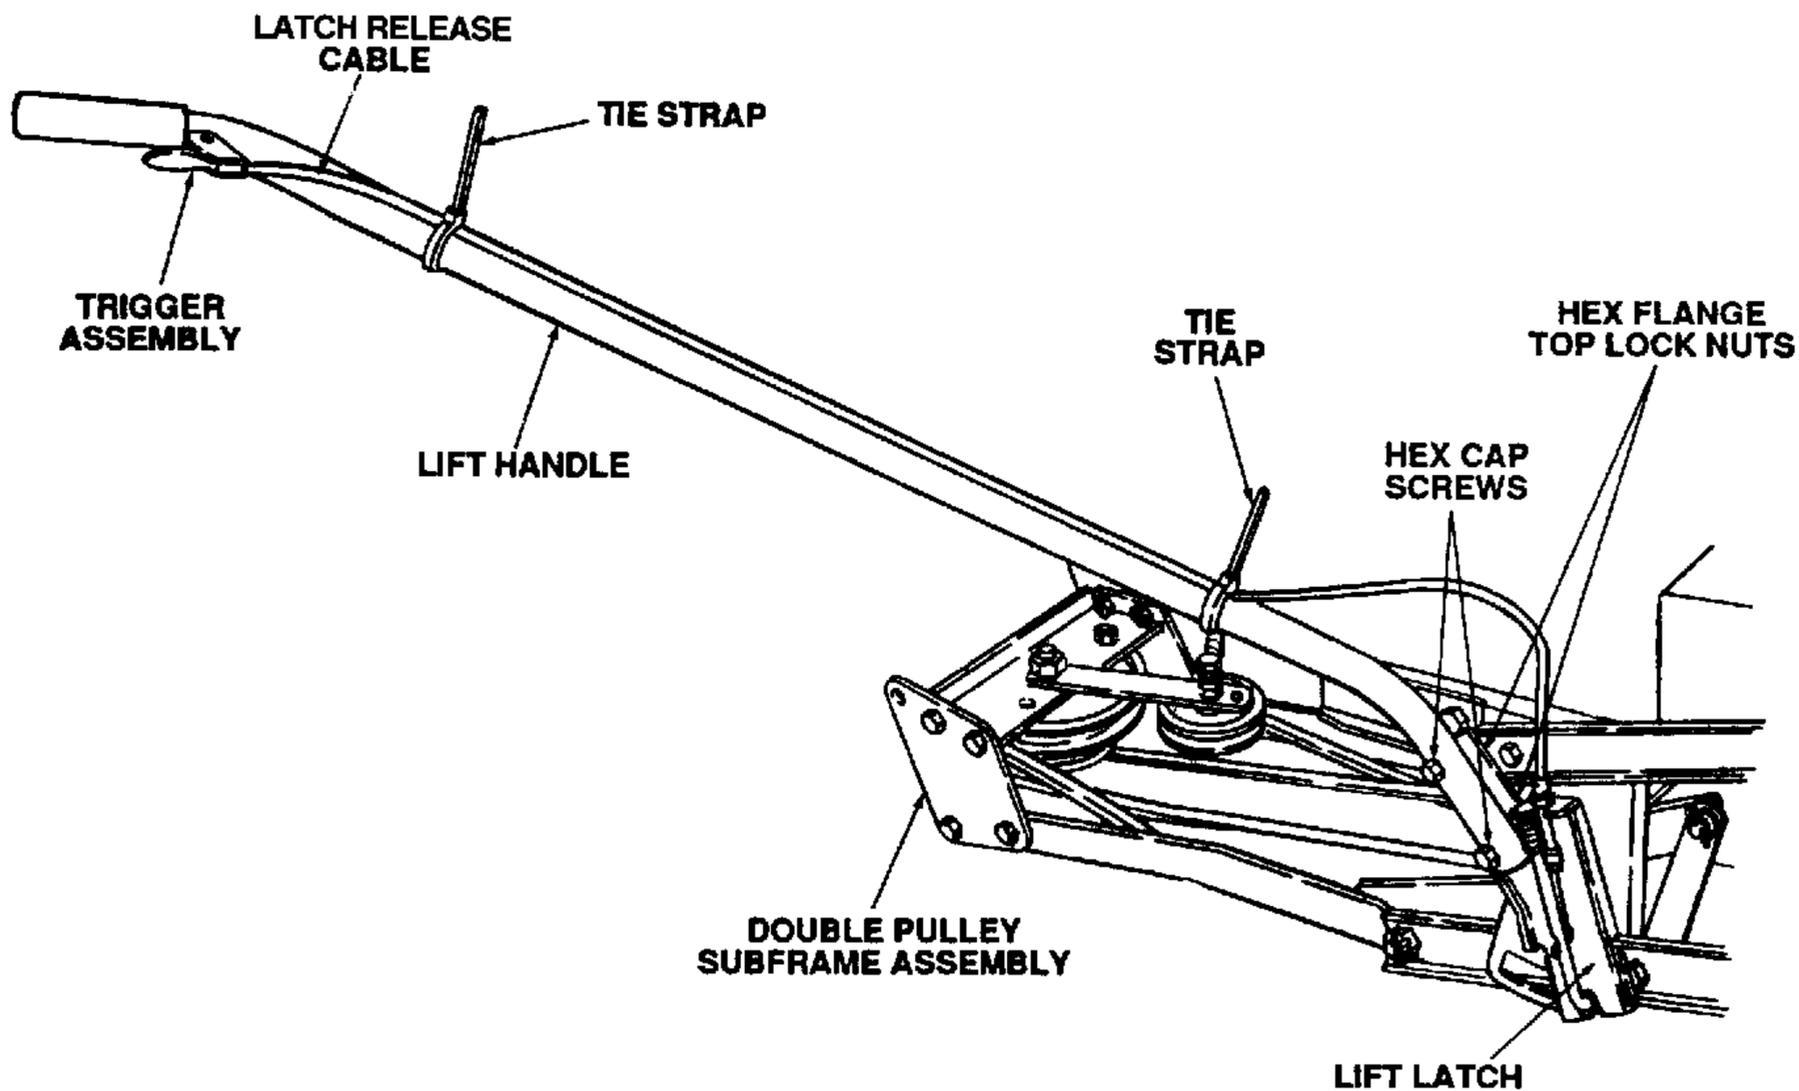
Installing Snow Thrower Lift Handle and Latch Release Cable.
